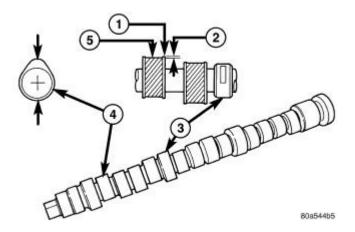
CAMSHAFT - INSPECTION Courtesy of CHRYSLER LLC
